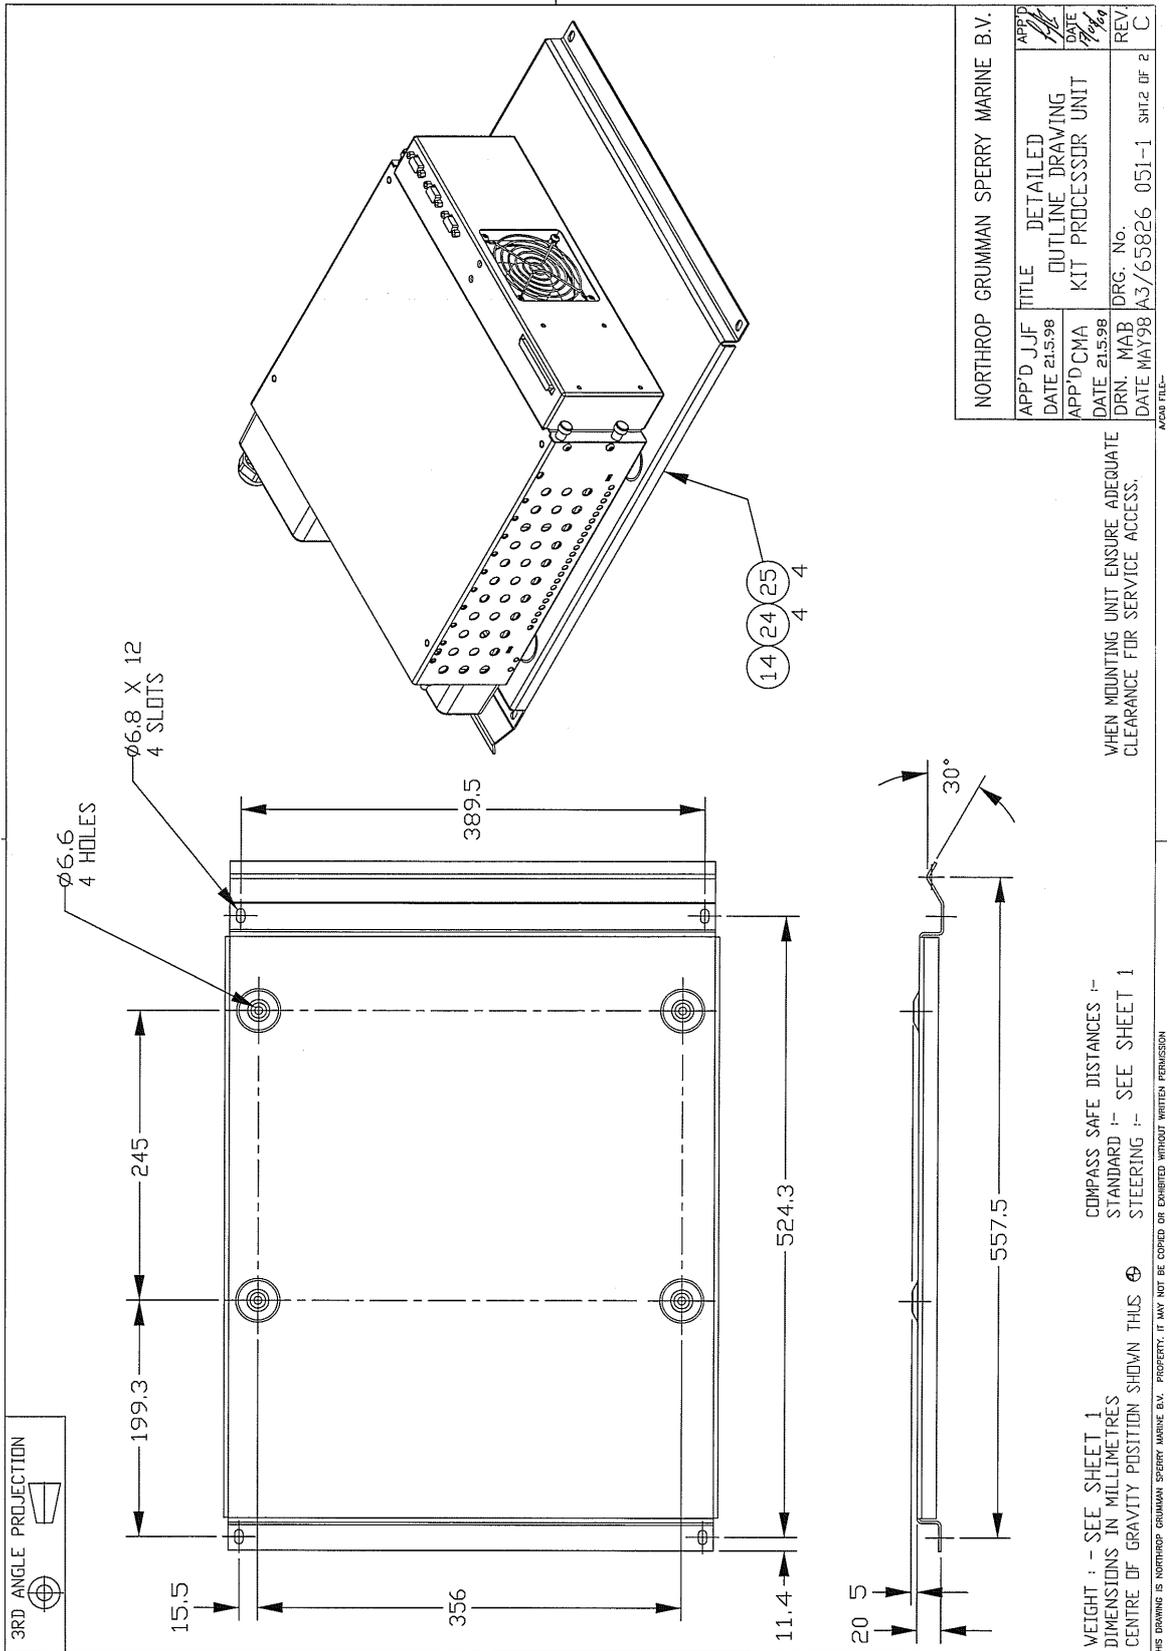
Processor Module (for VT cabinet) Outline Drawing
